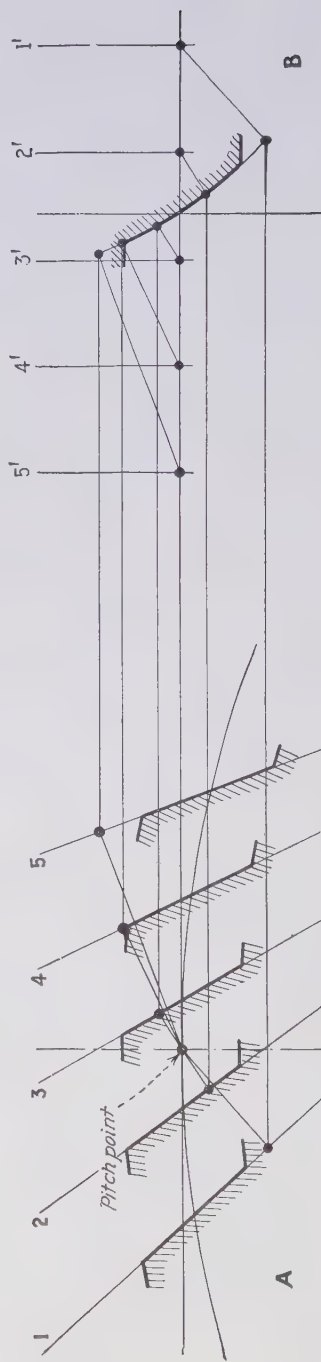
Development of the basic rack of a straight-line gear tooth.
